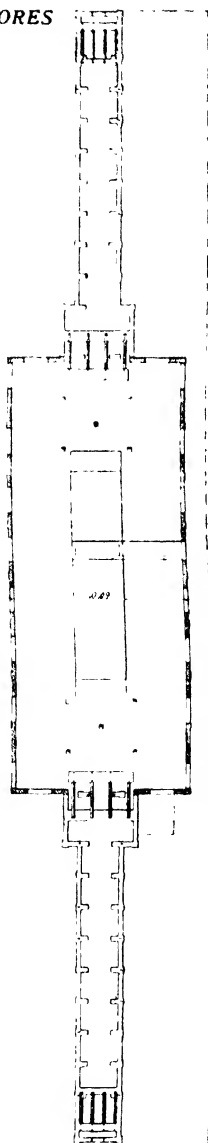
HEGELER ROASTING FURNACE PLAN OF FURNACE AND STIRRING MECHANISM
